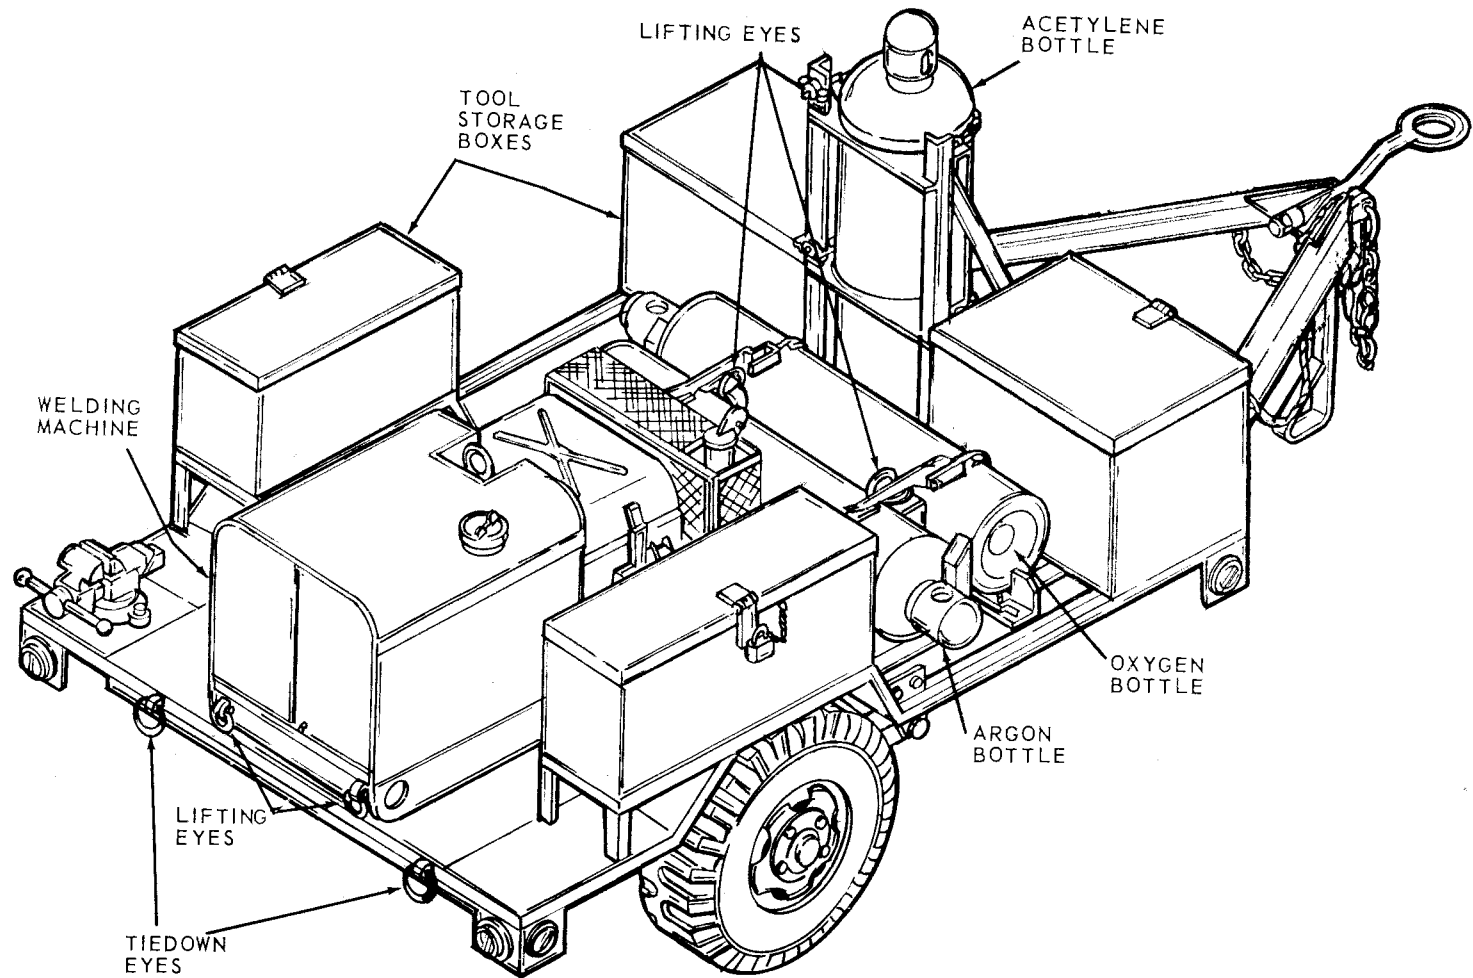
Welding shop, trailer mounted, left front.
